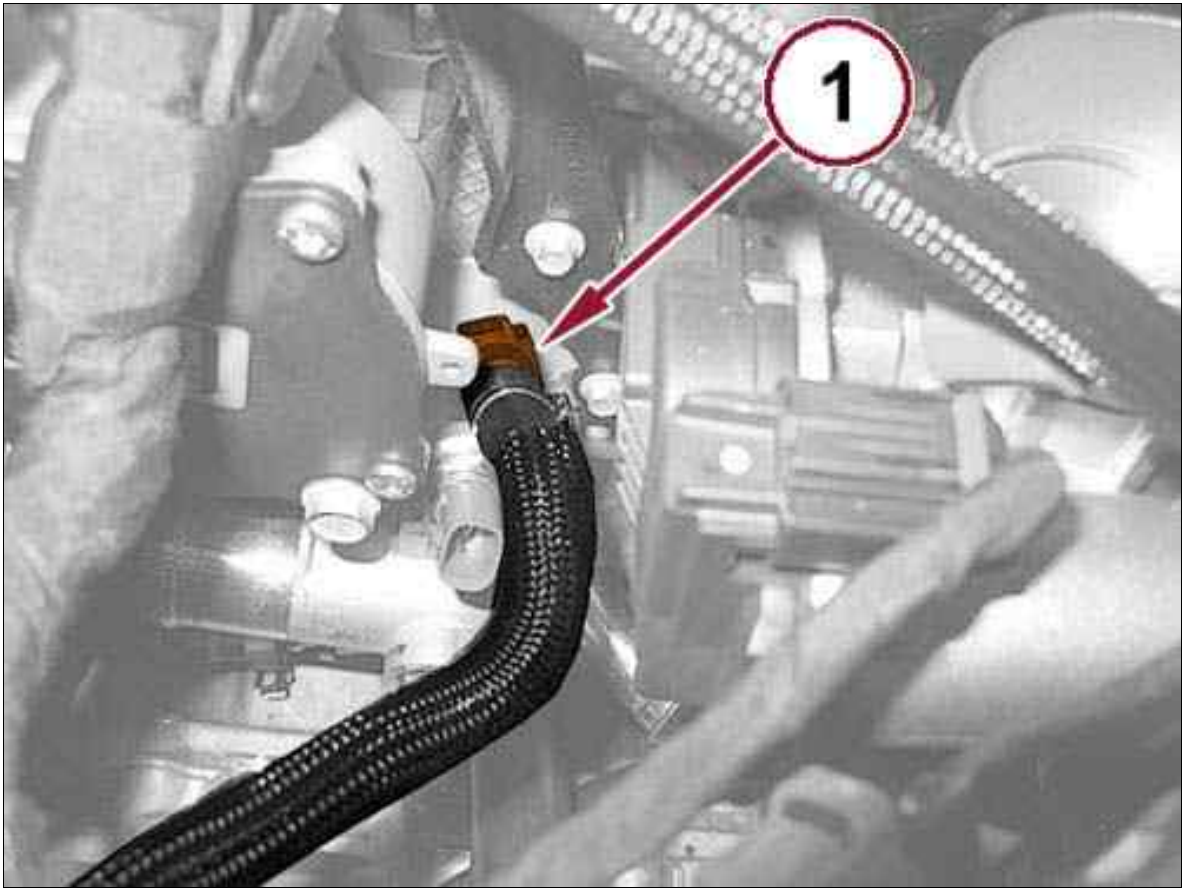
Coolant Tube To Thermostat Housing Lock Tab & Bolt
